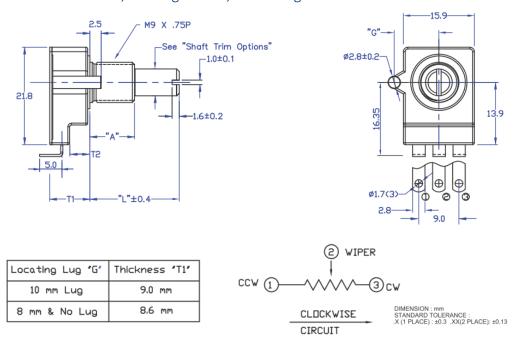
282U – Metal Shaft, Bushing Mount, PC Terminal Formed to Front
